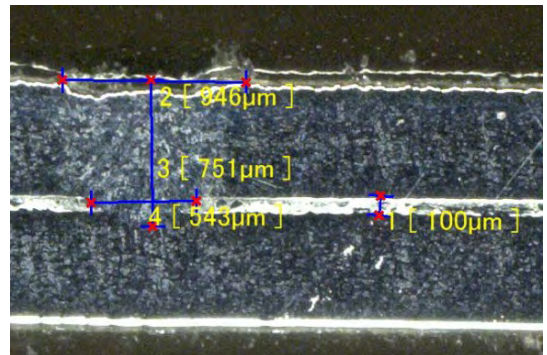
Picture of weld with spacer sheets, with 1 mm defocus
